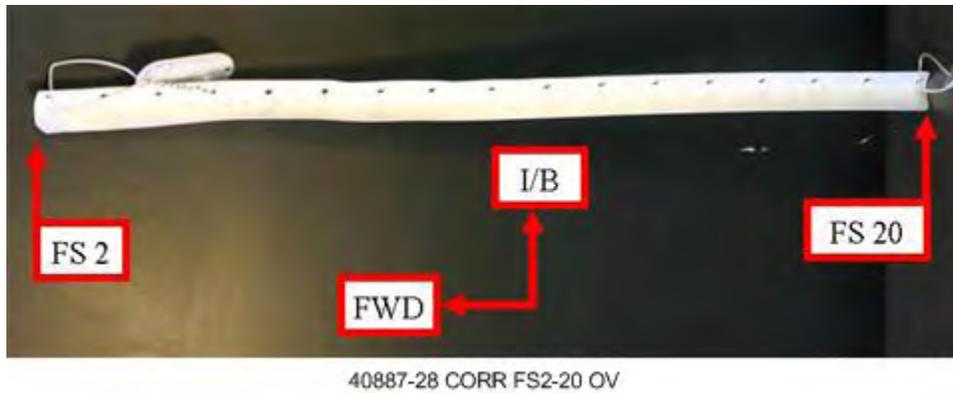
Location of Severe Corrosion on the Lower Forward Fuselage Right Side Skin Angle Attachment FS 2 Through FS 20
